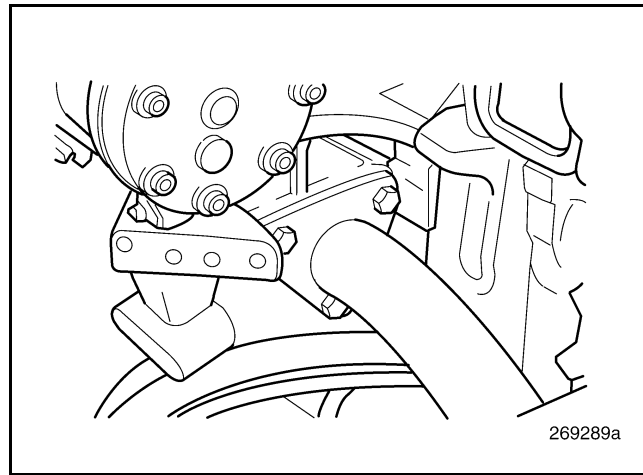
Coolant Inlet Tube Mounting (Back of Front-Redesign Water Pump)
